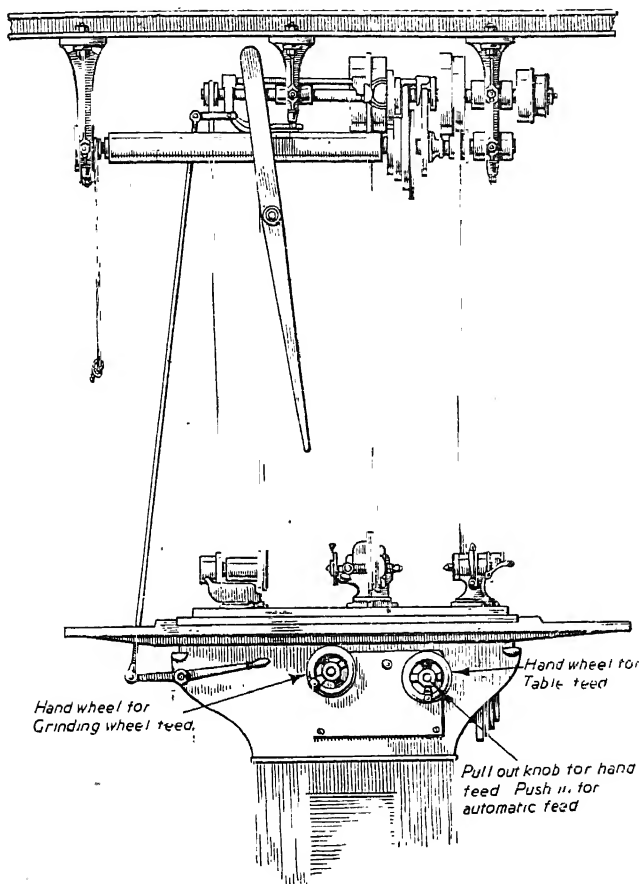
Front elevation of Brown and Sharpe universal grinder, showing overhead gear.
